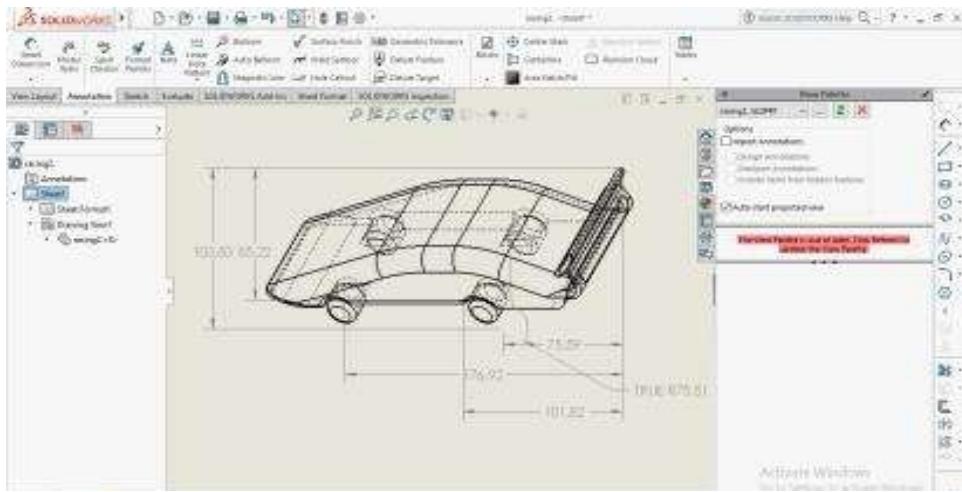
Racing Car Model Dimensions with Isometric View
